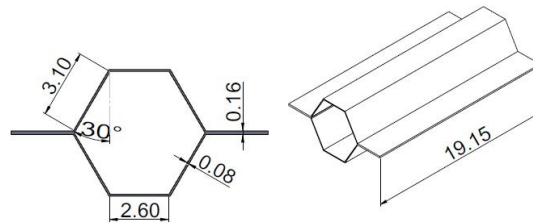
The geometry and dimension of a honeycomb cell (all dimensions are in mm) [4].
